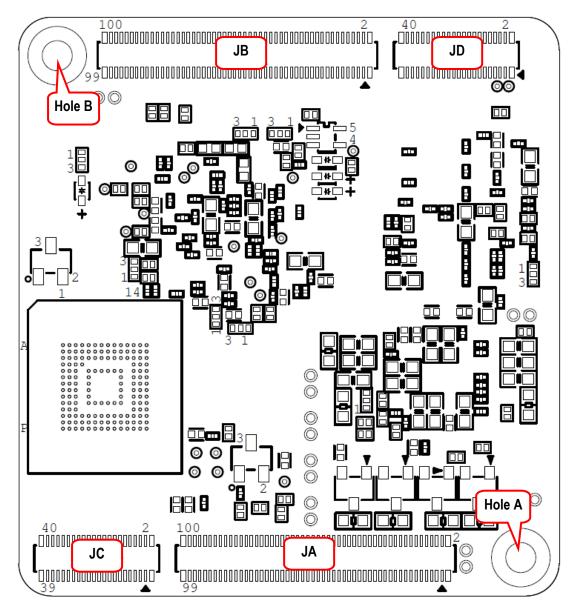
iMX7ULP uCOM (EAuCOM standard) Board Pin Numbering, Bottom Side
